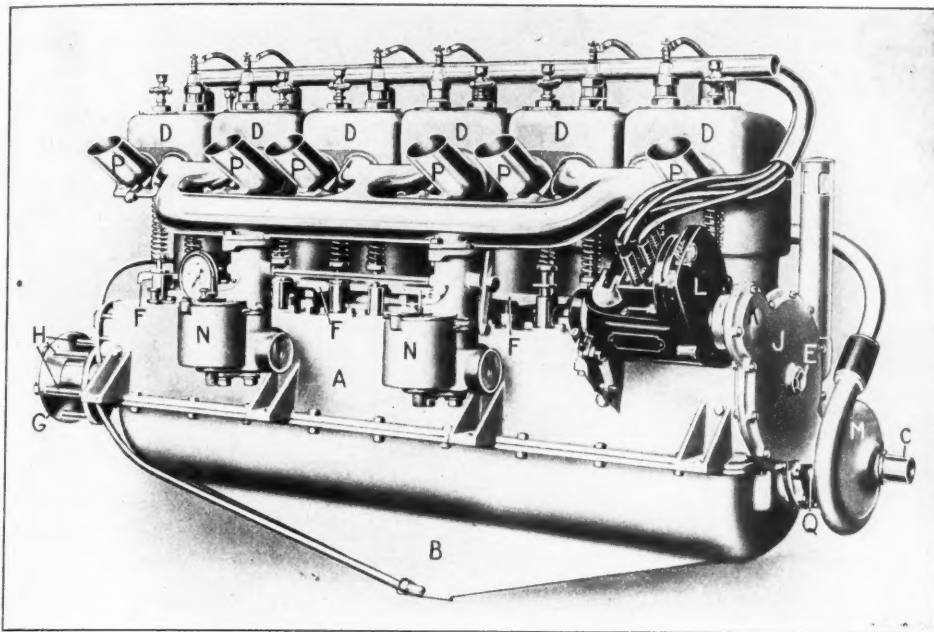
The Sturtevant Aeronautical Motor, Six-cylinder
